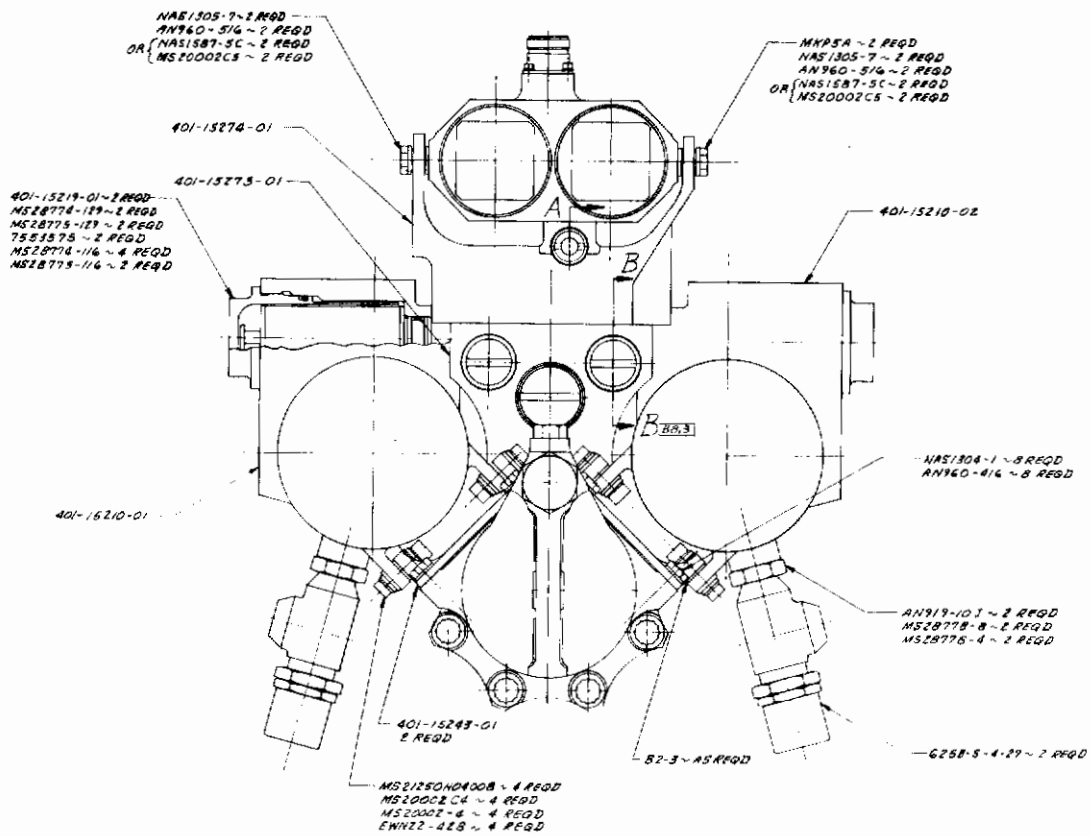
DUPLEX ACTUATOR ASSEMBLY (SHEET 2 OF 2)
